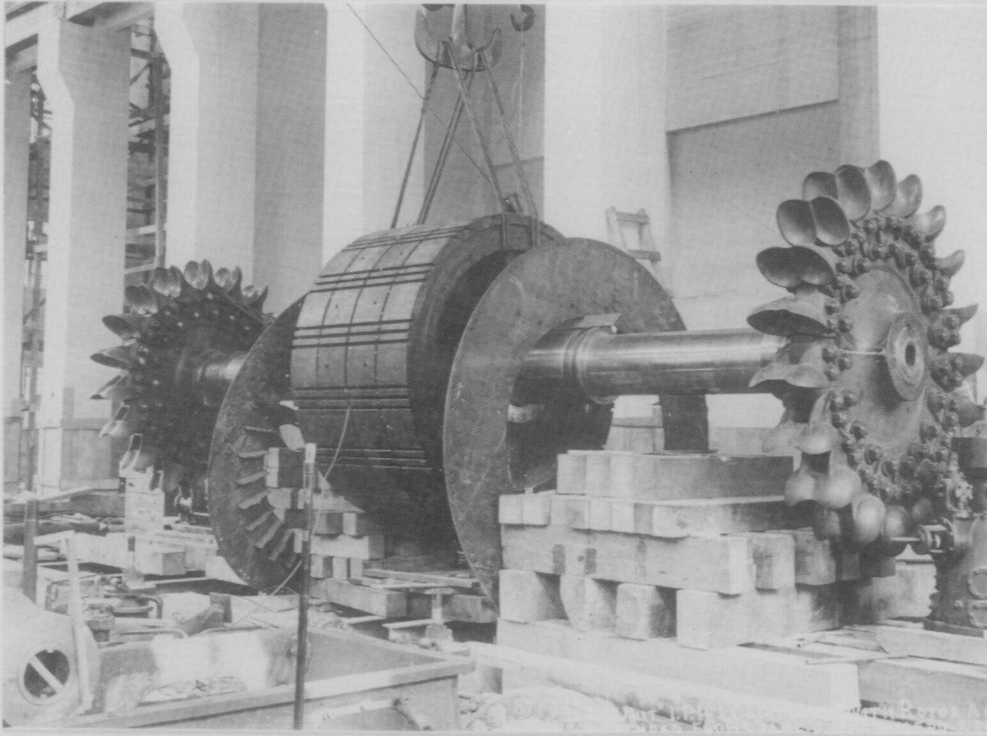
Installing Unit 1 in Powerhouse No. 1, July 1913 (SCE var. [b]:Album 6, No. 520).
